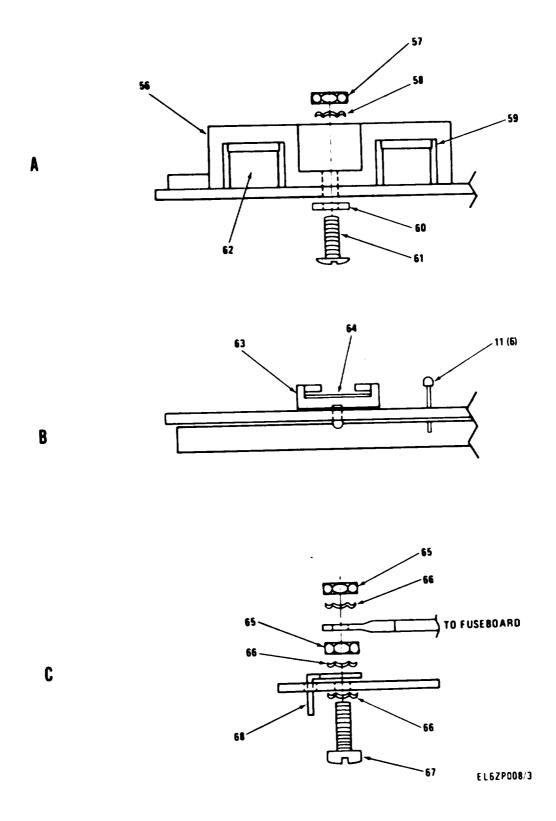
Man Machine Interface Board (Sheet 3 of 3).
